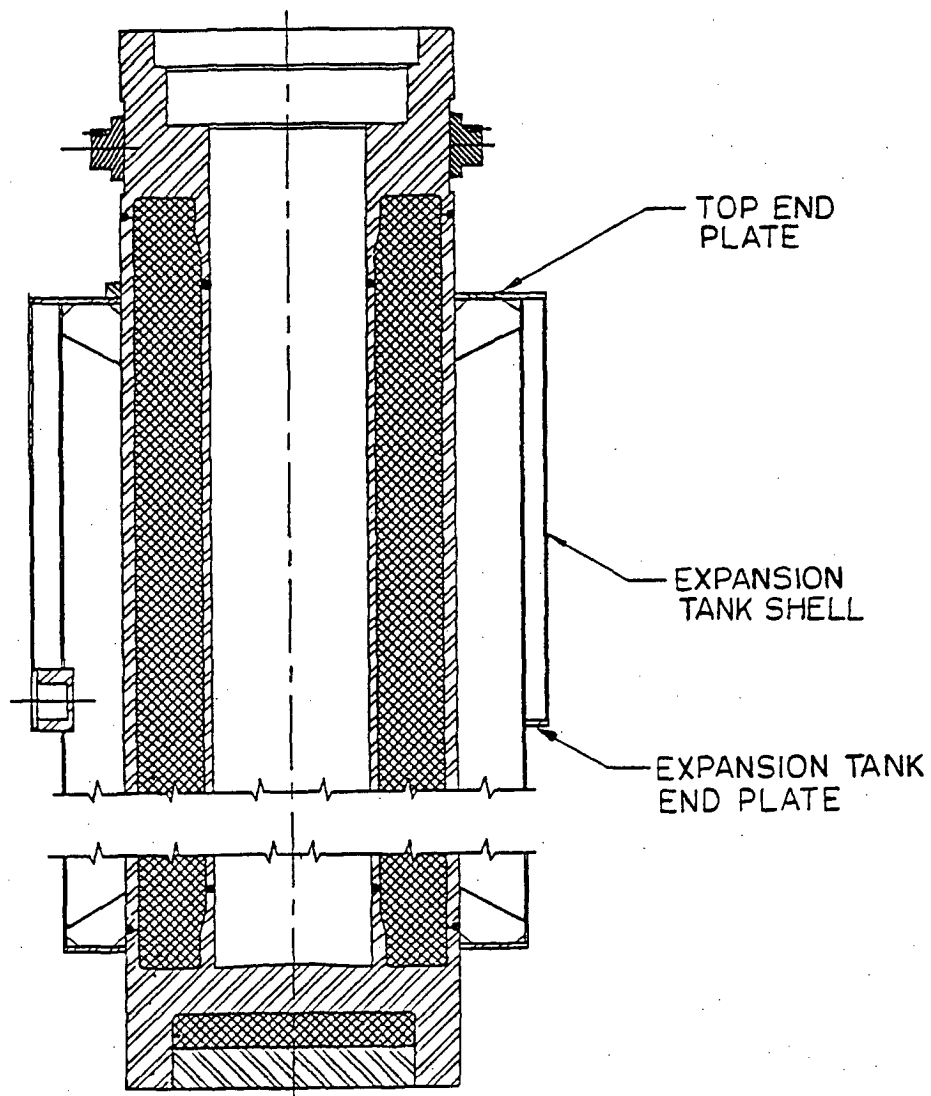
Expansion Tank Top and Bottom End Plate
